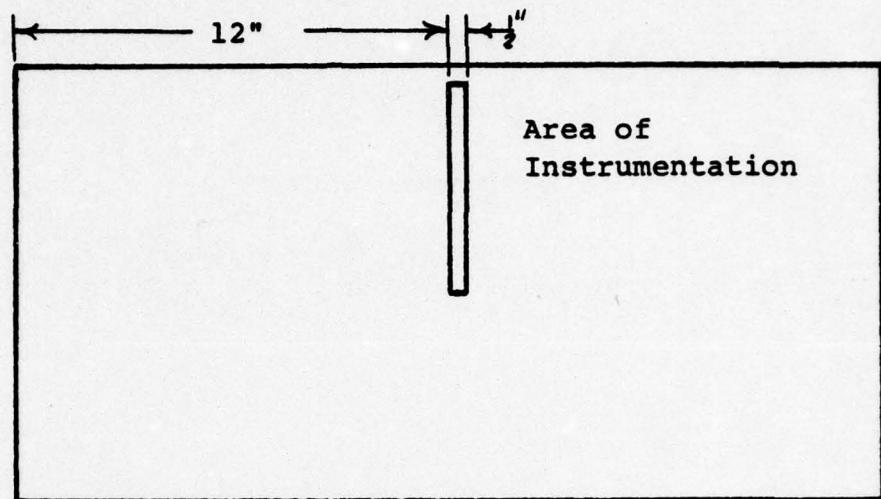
Location of Instrumentation on HY-130 Specimen I and 1020 Steel
